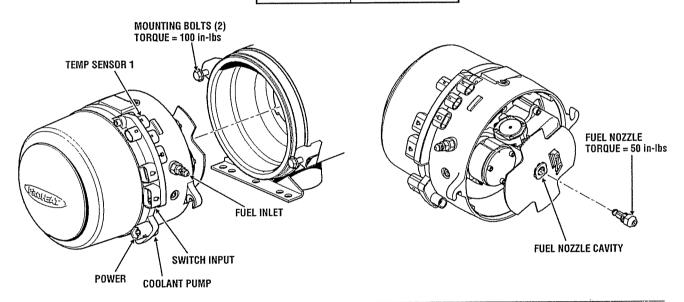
Burner Head Removal and Fuel Nozzle Removal
